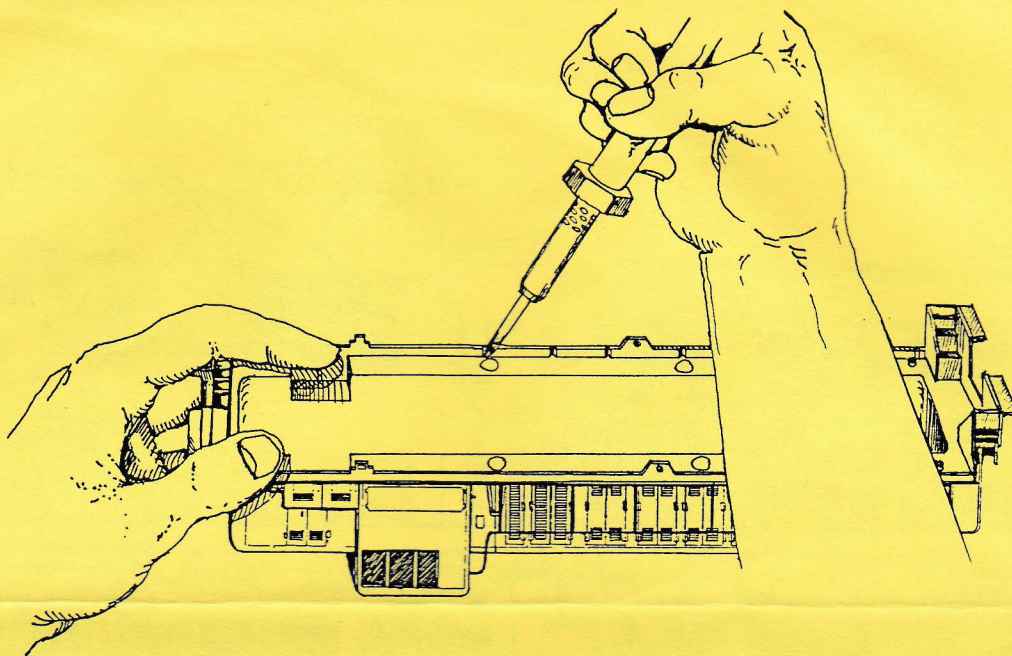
Welding the stanchions pins to the inside of the side sill.
